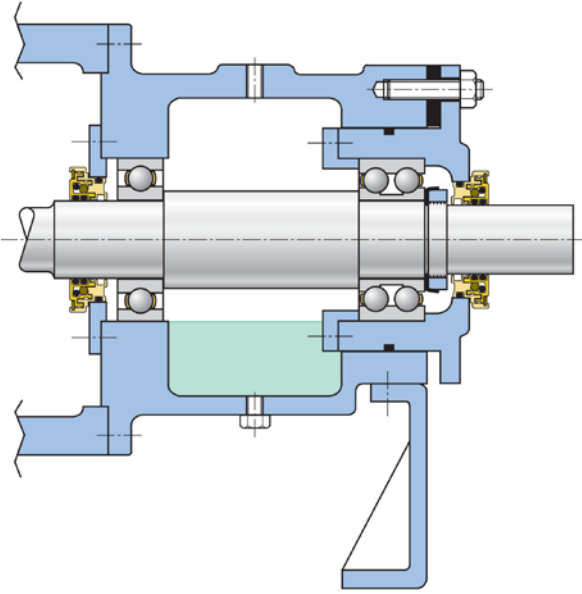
Bearing housing with oil level lowered to accommodate high DN value. A flinger disc or other means of spraying oil into bearings will be needed (Ref. 3)
